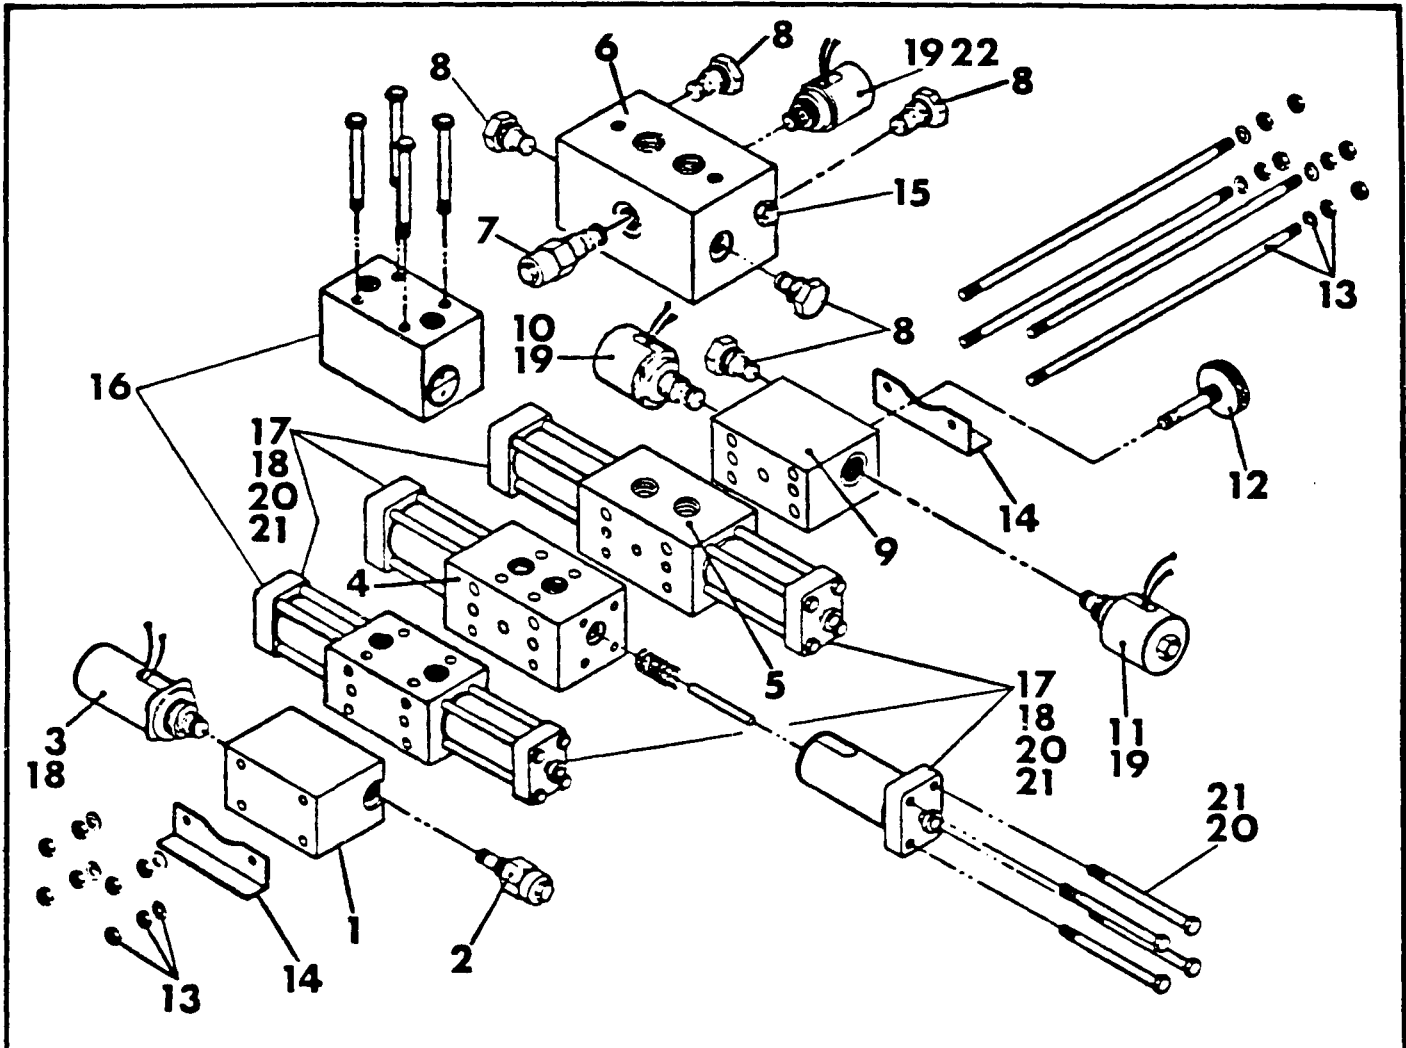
K - COMPONENT BOX CONTROL PANEL ASSEMBLY
